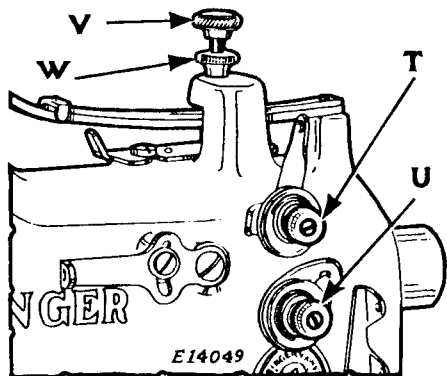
To Adjust Needle Thread and Loper Thread Tensions
